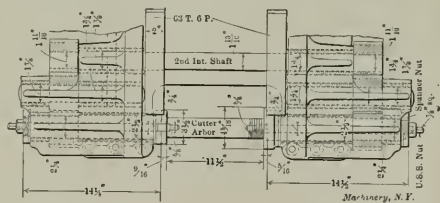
Spindle Driving Mechanism of the Walcott Rack Cutter.
